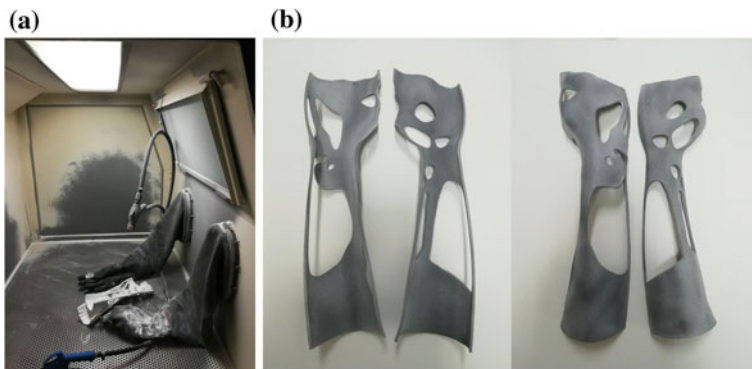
a Air jetting chamber for excess powder removal and b final parts of the orthosis
